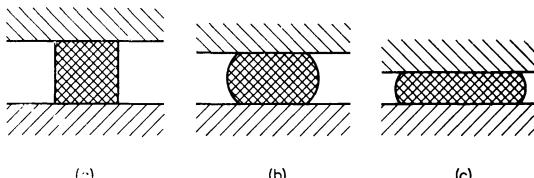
Rubber gasket with square cross section: (a) before compression between flat flanges; (b) after compression between greaseless surfaces; (c) after compression between greased surfaces
